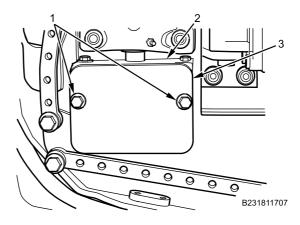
Inner Door Handle Shaft Cover Plate Installation.
